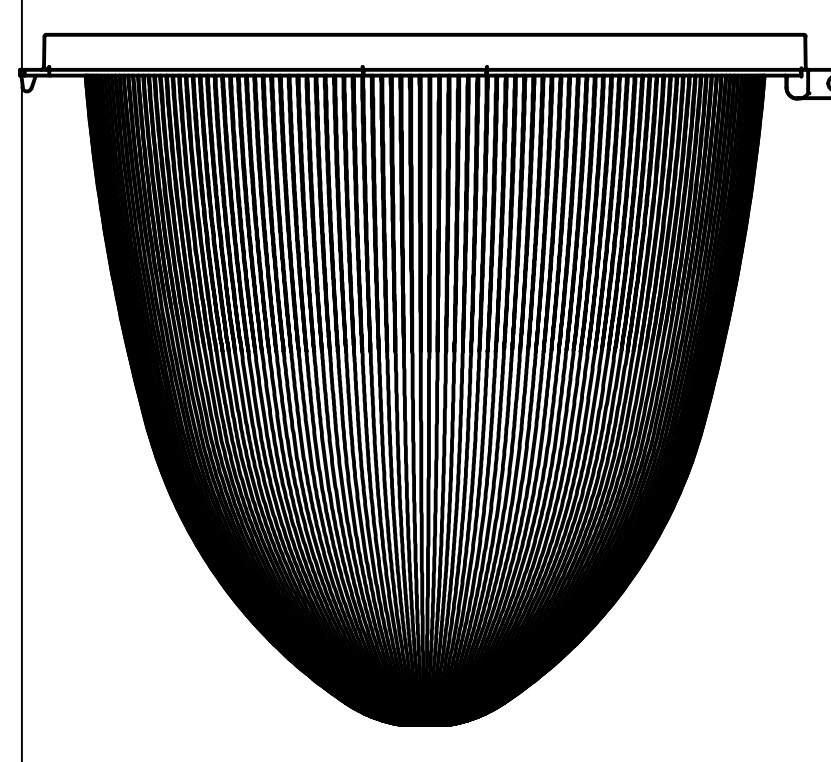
OPTIONAL TEAR DROP GLASS REFRACTOR/BOTTOM DOOR ASSEMBLY
